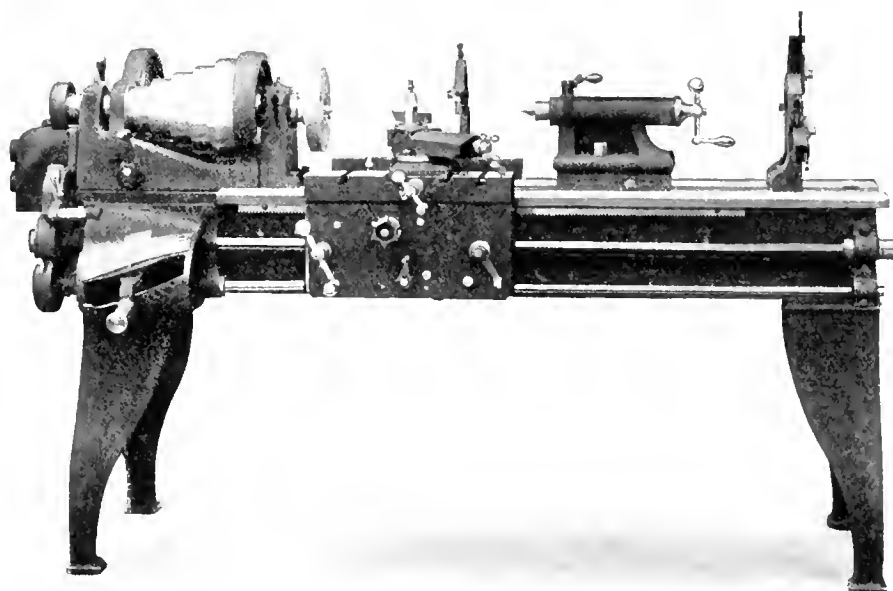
Fourteen-inch Engine Lathe placed on the Market by The Cincinnati Iron & Steel Co., Cincinnati, Ohio
